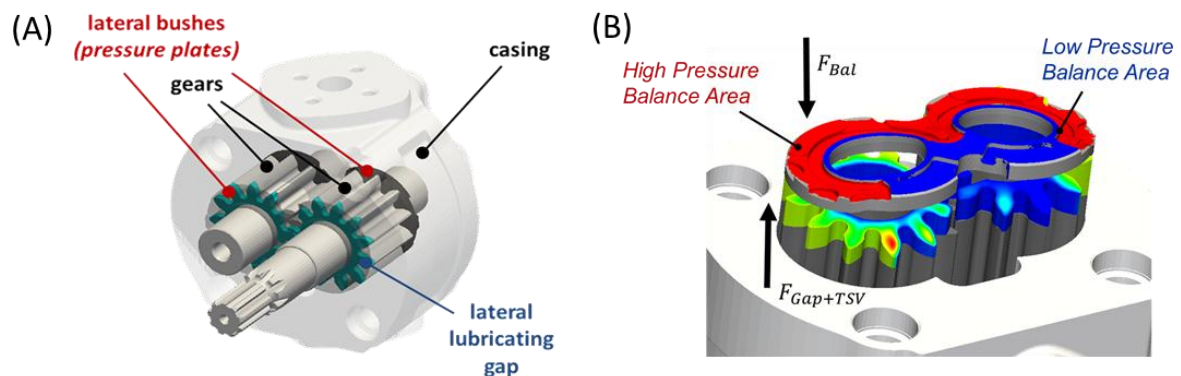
(A) Lateral lubricating gaps in external gear machines (B) High pressure and low pressure balancing areas on the side of the lateral bushing not facing the gears
